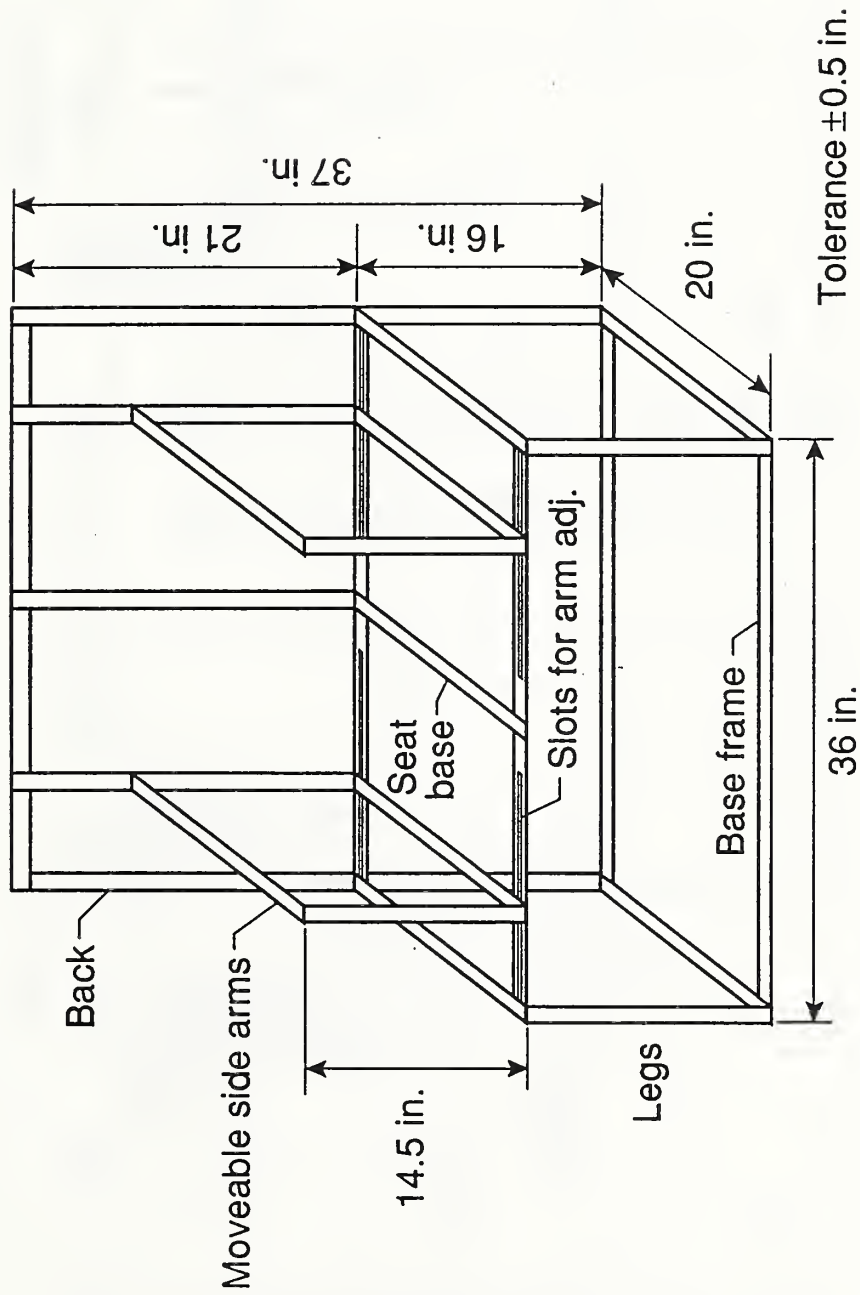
Chair mock-up frame specified by CB 133 ignition test procedure.
